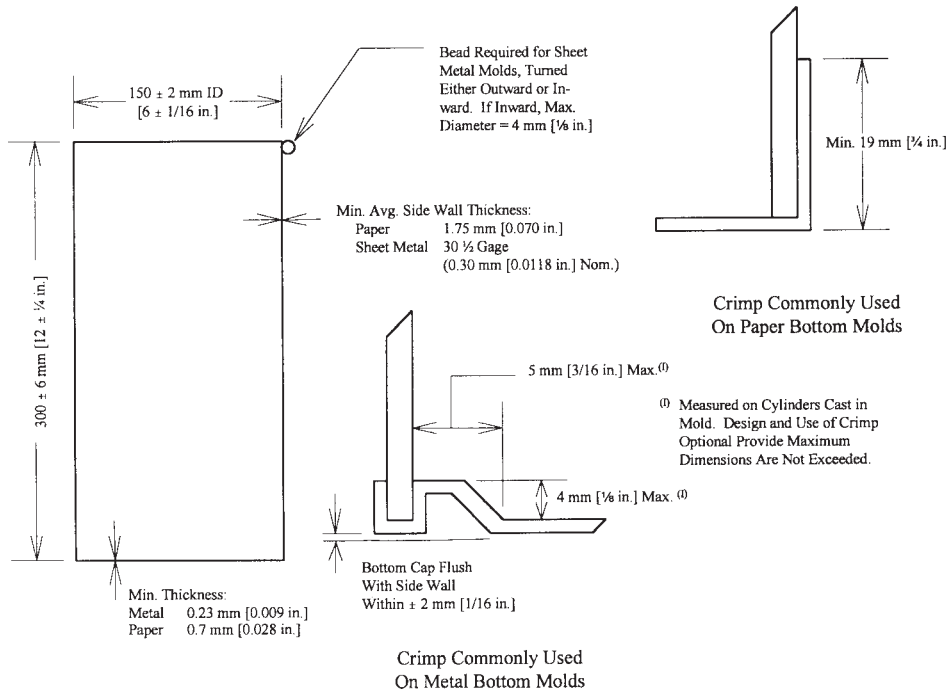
Dimensions of Single Use 150 by 300 mm [6 by 12-in.] Paper or Sheet Metal Cylinder Molds
